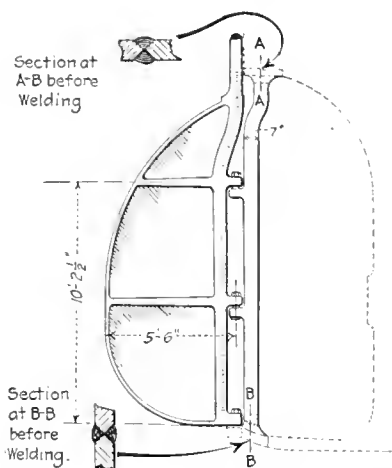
RUDDER POST REPAIRED BY WELDING.
